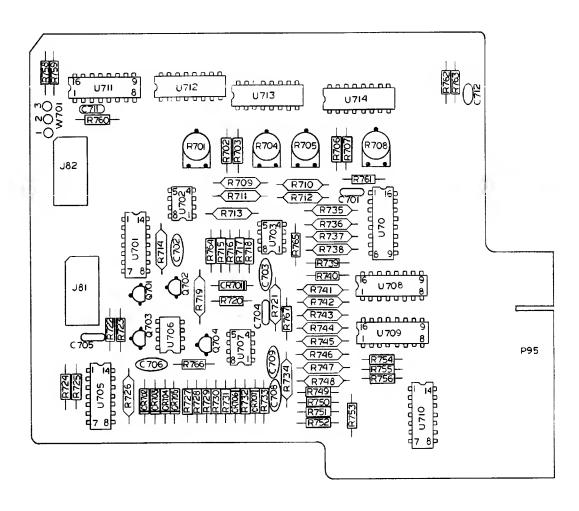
A11/A12 Remote Control Unit PCB Assemblies 1 and 2, -12 & -15 Options (cont)
